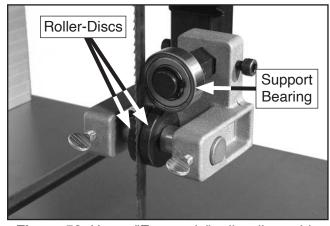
Upper "Euro-style" roller-disc guide assembly.
